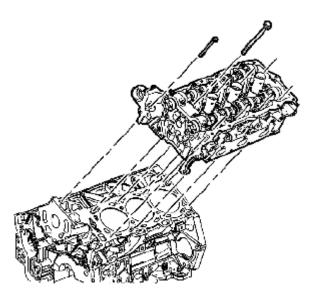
Identifying Cylinder Head Gasket Courtesy of SUZUKI OF AMERICA CORP.
